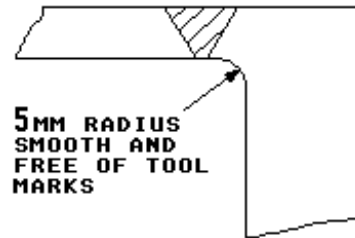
(b) Dressed smooth butt weld joint.
